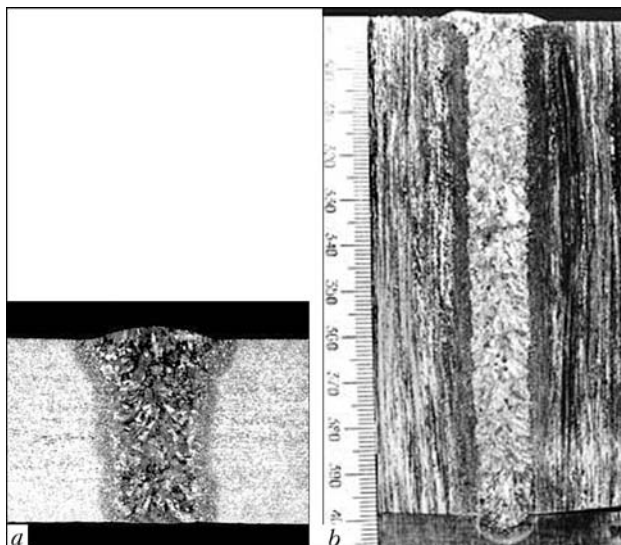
Macrostructure of different-thickness welded joints made by the narrow-gap magnetically-impelled arc welding method: *a* – 25 mm (VT1-0); *b* – 110 mm (Ti-6Al-4V)
